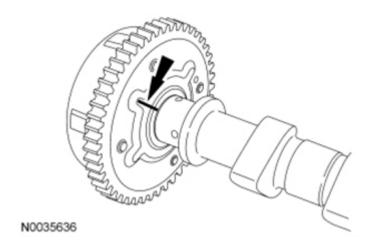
Locating Sprocket And Camshaft Reference Mark Courtesy of FORD MOTOR CO.
